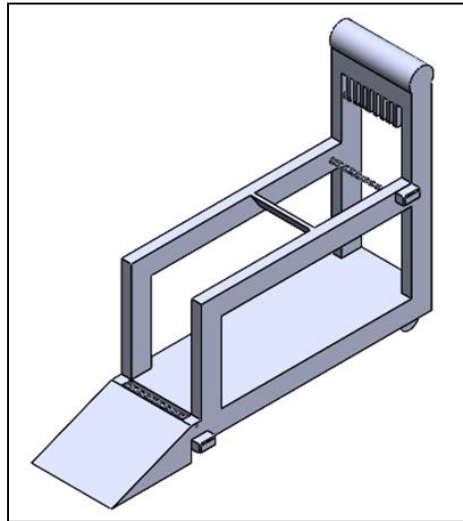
Shuttlecock Collector Machine Solidworks drawing
